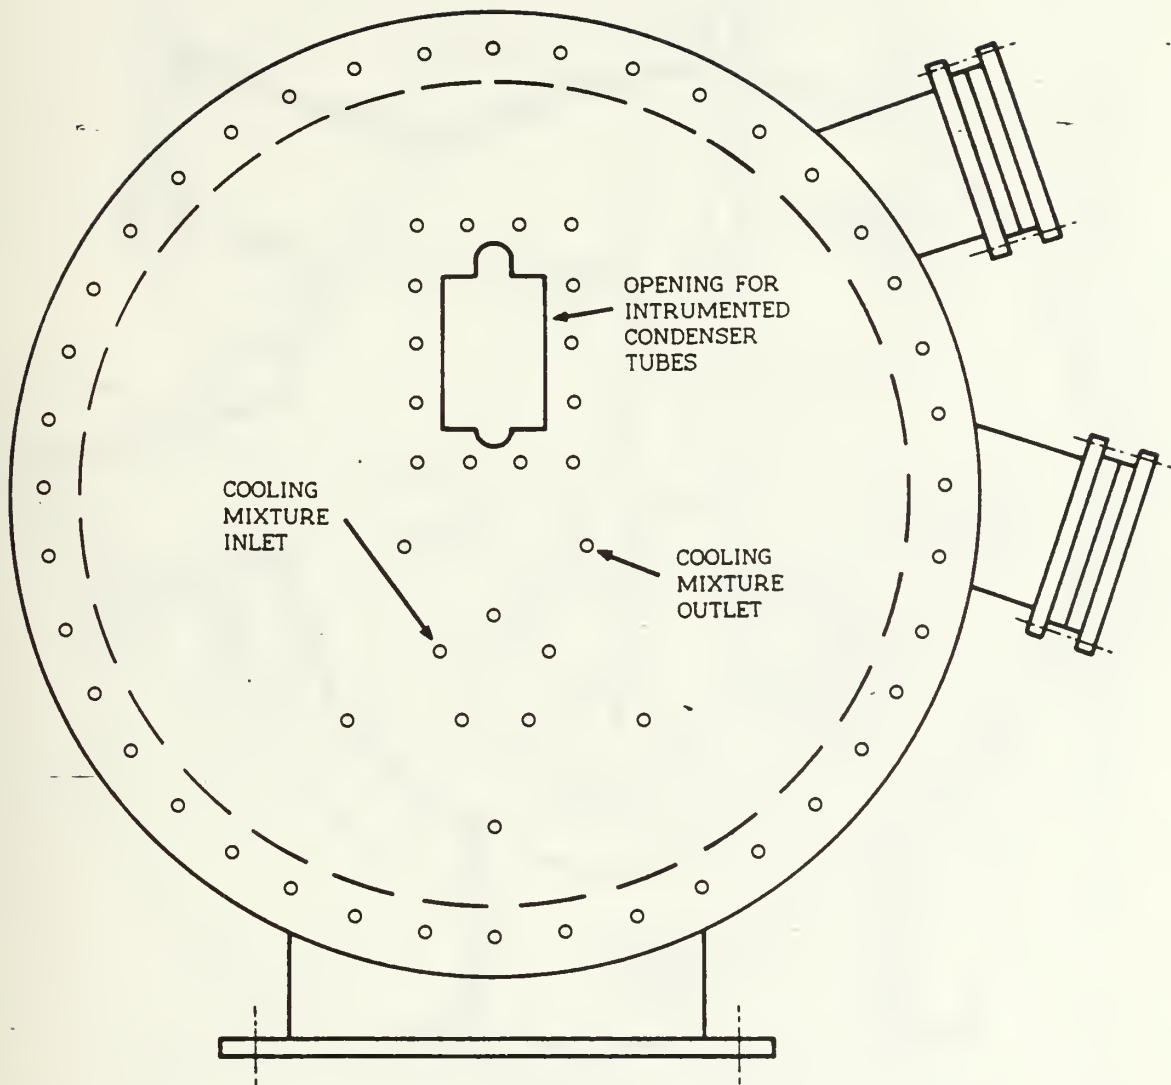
End View of Multi-Tube Apparatus Condenser
